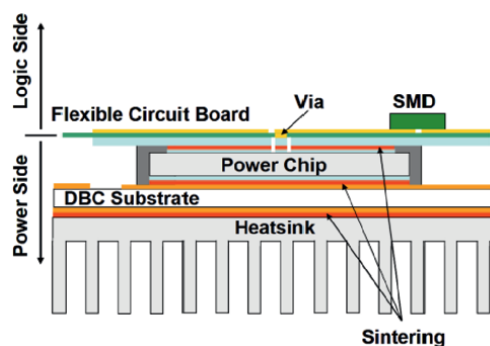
Schematic cross-section of the SKiN device. The device exhibits no solder layers, nor any wire bond interconnects and is integrated with a pin fin heat sink.
